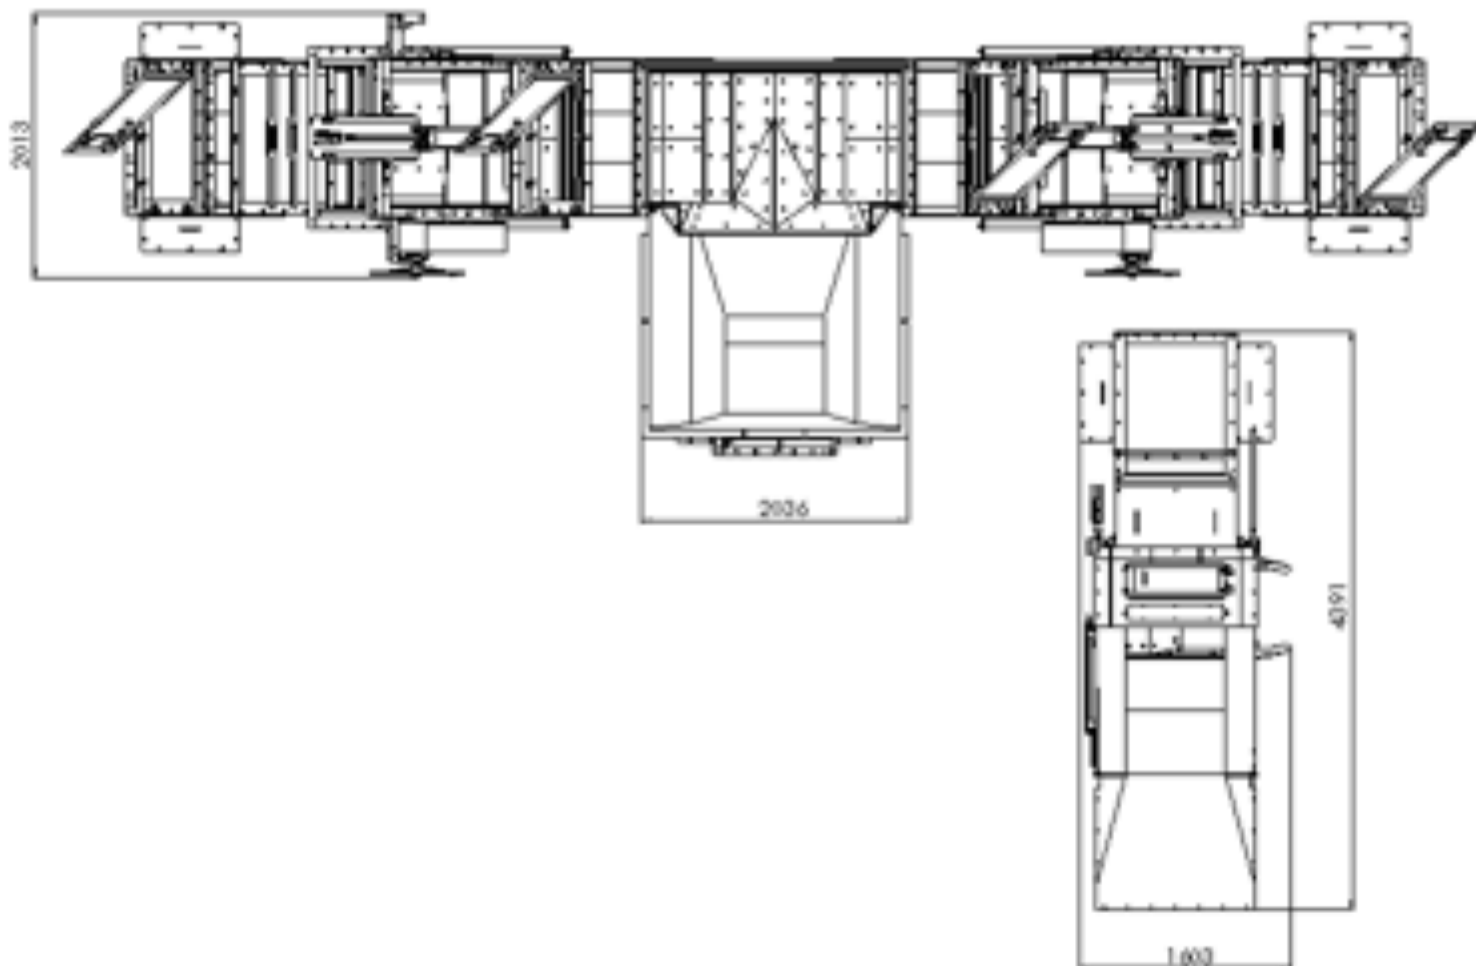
Three-way transfer chute (3+2) - overall envelope dimensions, selected side view.
